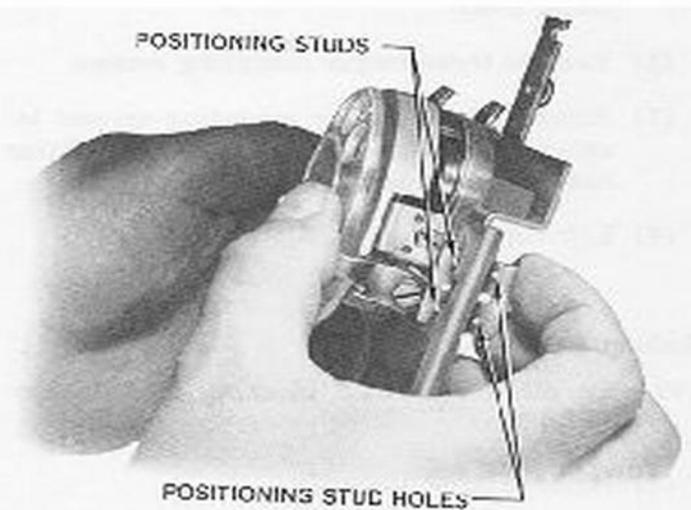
Placing Rotary Dial in Dial Mounting Plate
